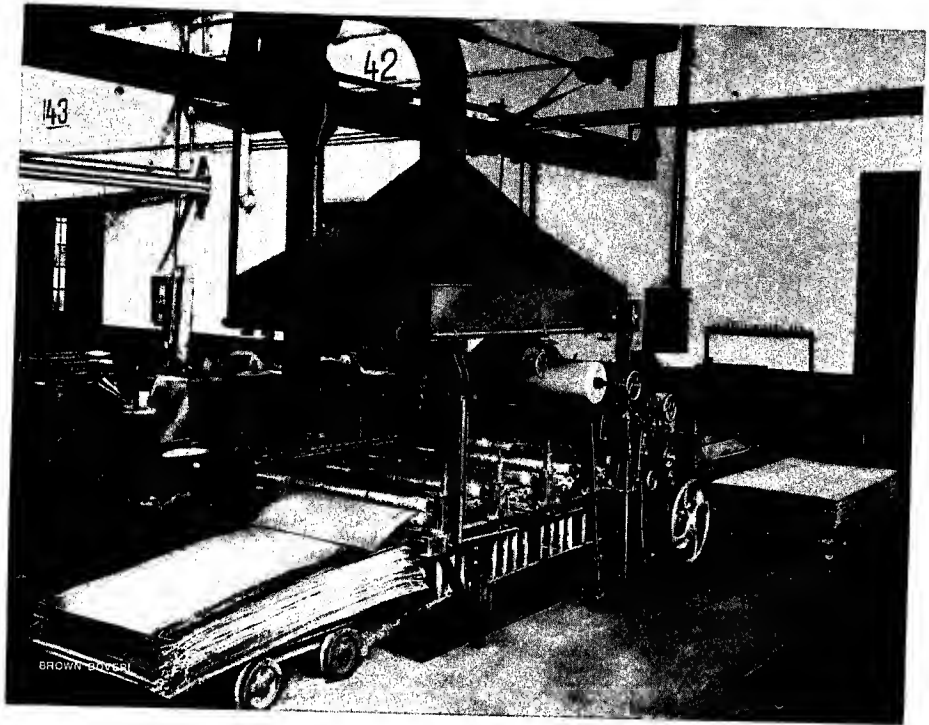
Machine for pasting paper insulation to dynamo-steel sheets.
